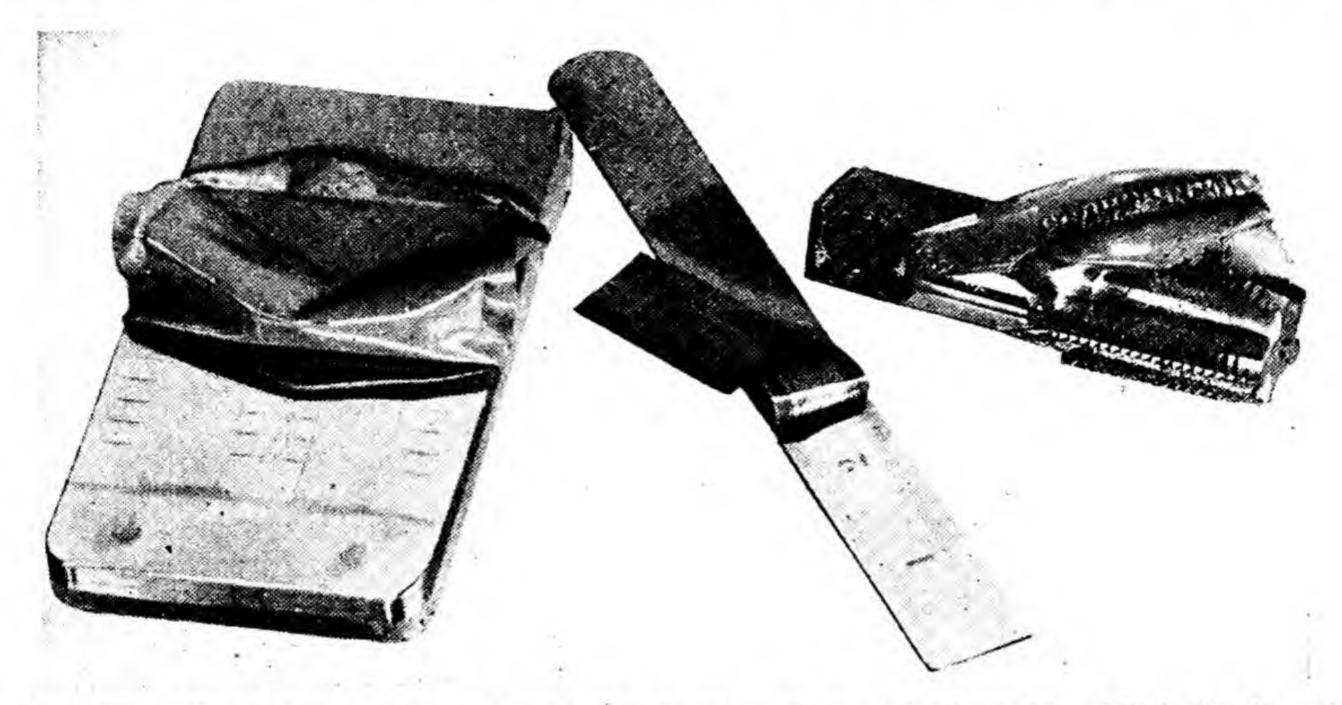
Vinyl strip coatings for the protection of machined parts. (Bakelite Corp.)
